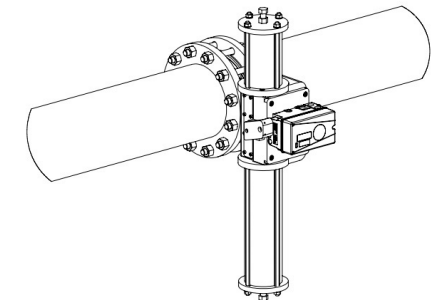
Recommended mounting direction of a spring return actuator, spring cylinder facing downwards.
